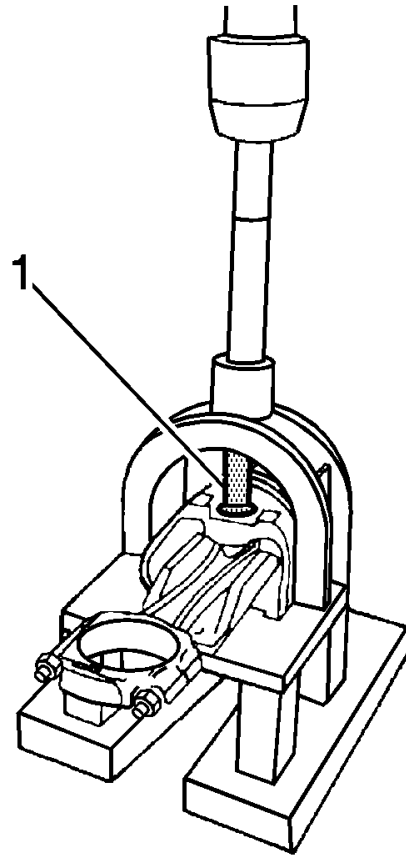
View Of Piston Pin And Installation/Removal Tool J 24086-B
